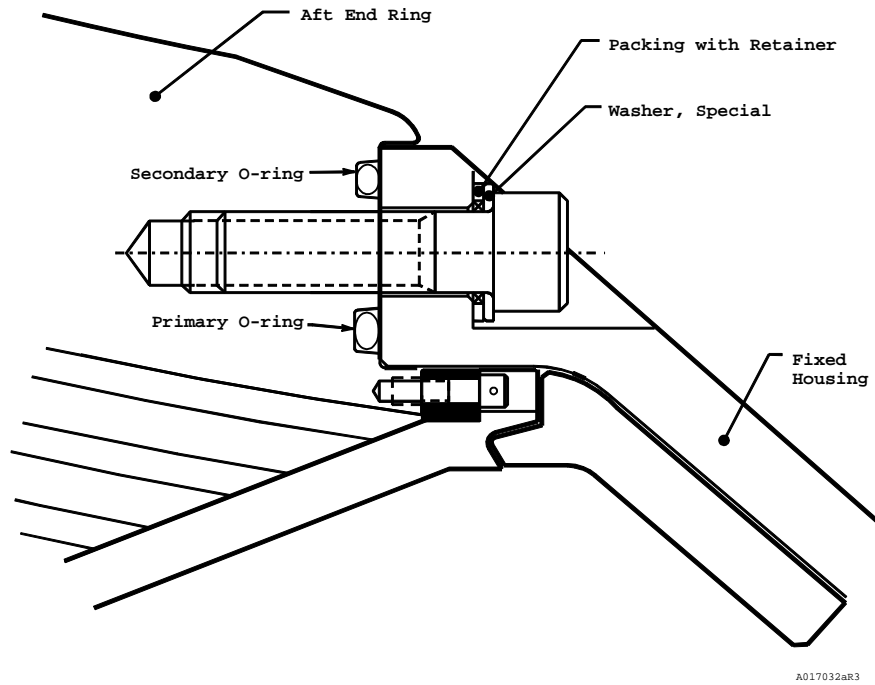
Fixed Housing-to-Aft End Ring Joint Packing with Retainer
